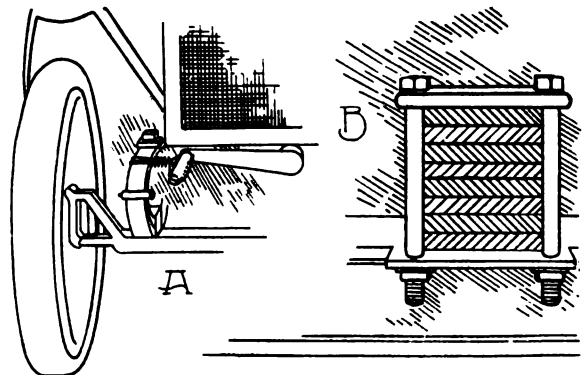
A, An Efficient Crank Holder Made of a Spring; B, An Easily Made Spring Shackle.
